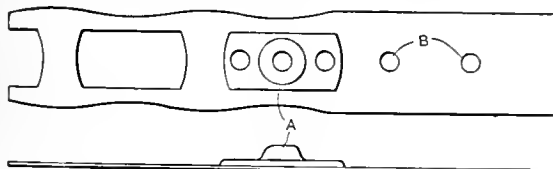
Appearance of the Stock from which Plates A are Blanked
